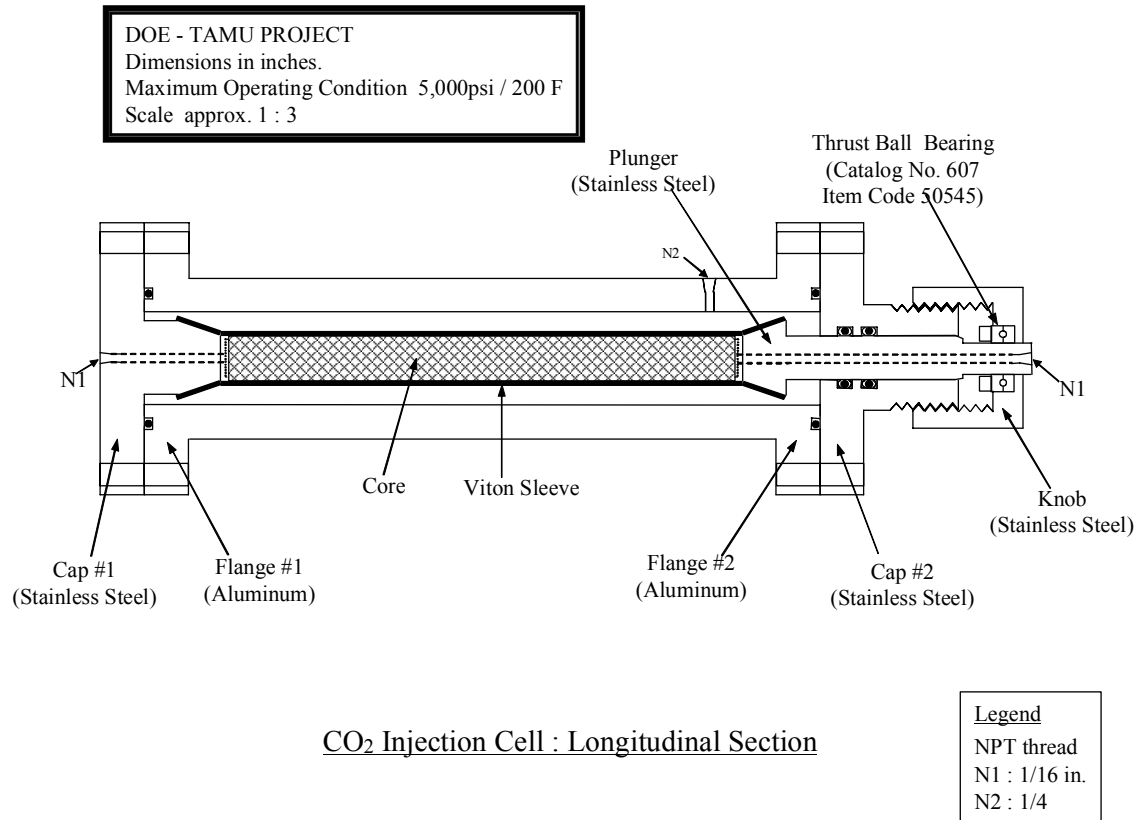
Design of aluminum core holder used for X-ray CT scanning.
